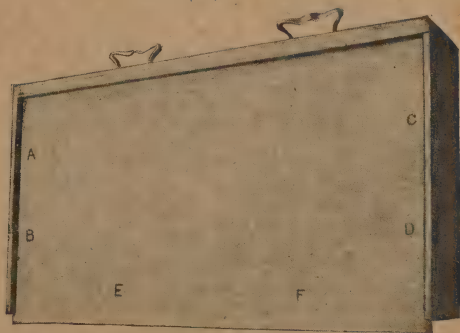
Drawer Bottom Secured with Glue and Pins
